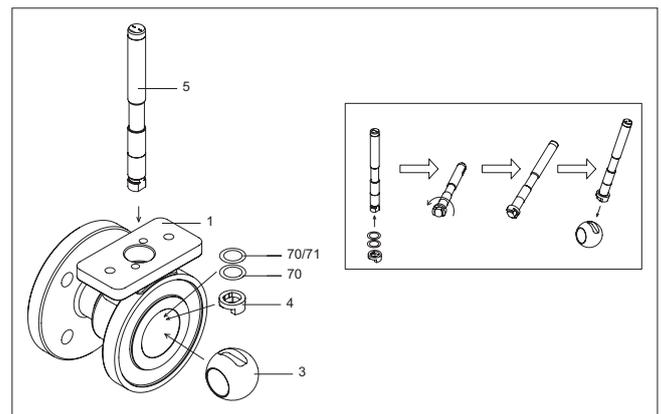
Assembling the shaft in sizes 1" and 1 1/2"
